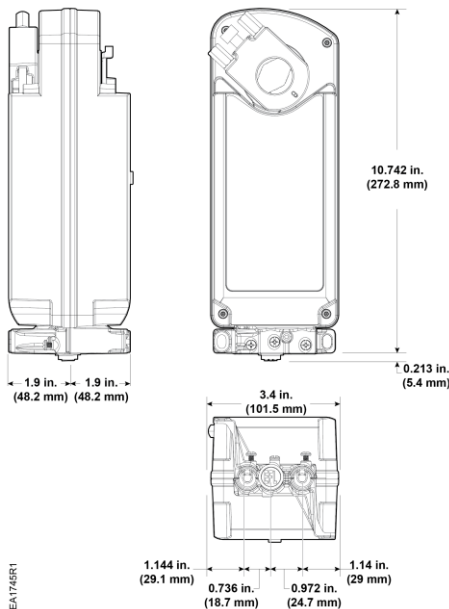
GXVD Series Damper Actuator and Mounting Bracket Dimensions in Inches (Millimeters).
